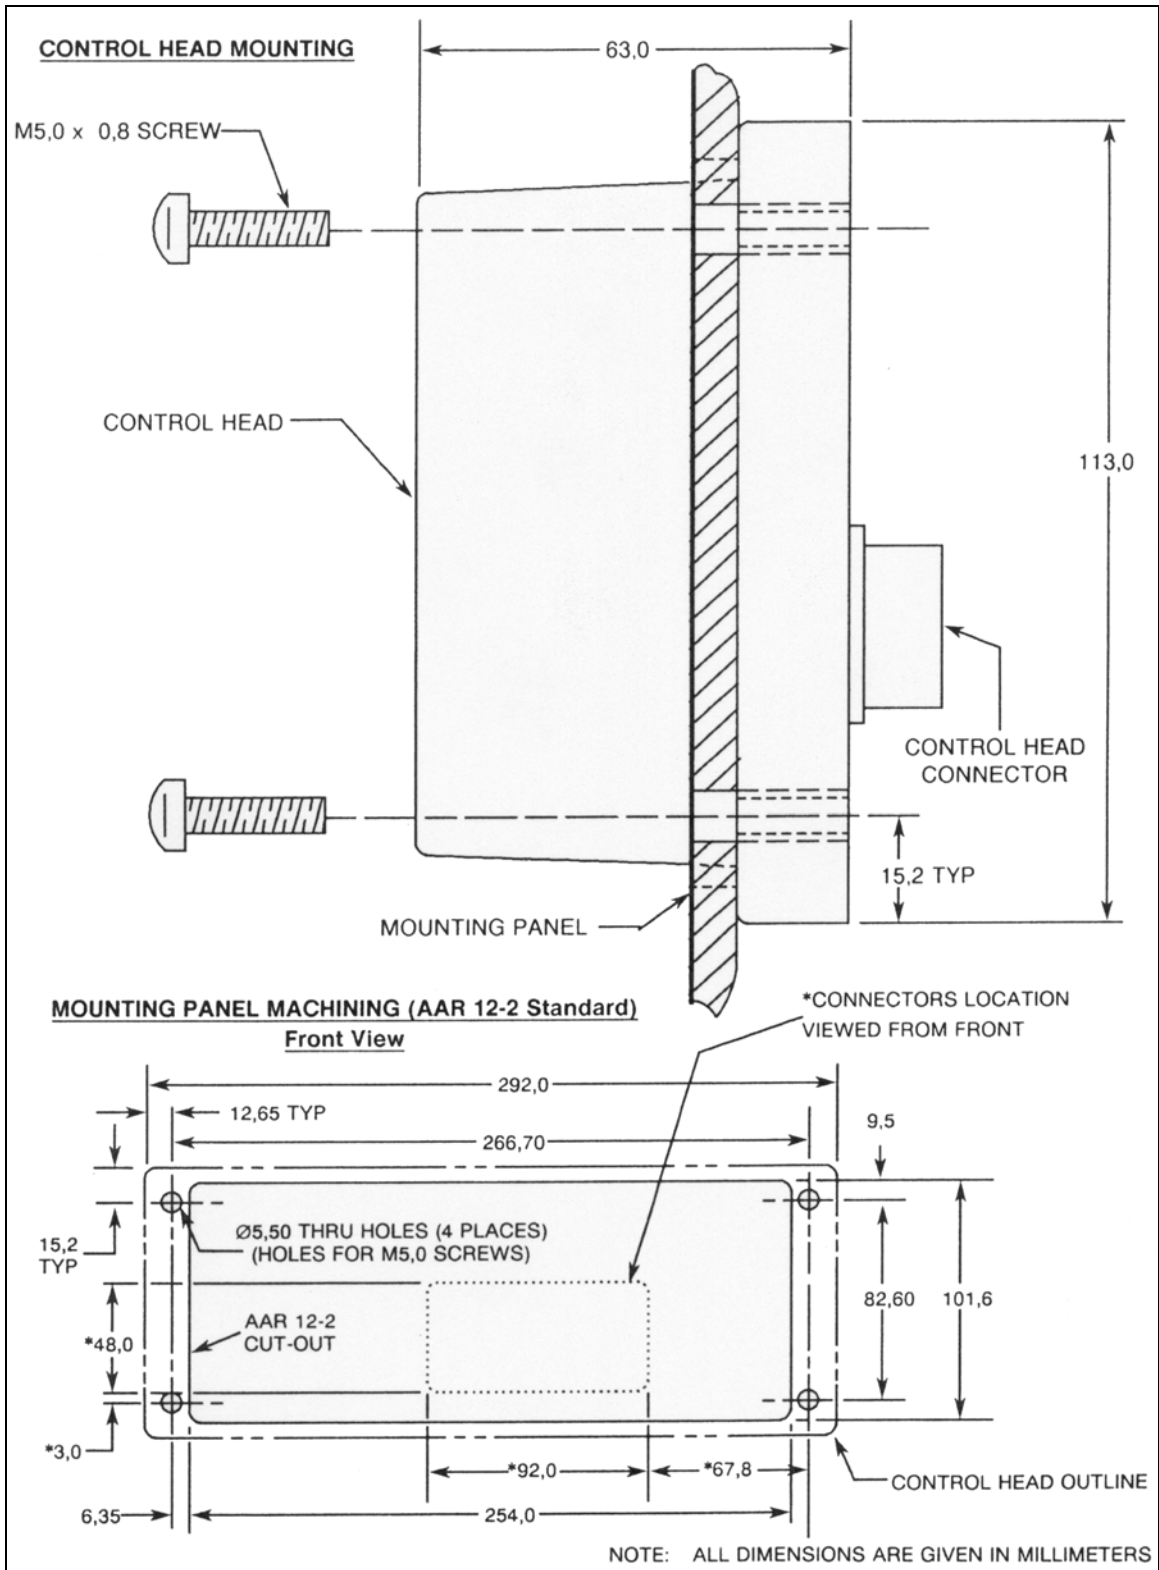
Remote Control Head Thru-Hole Mounting
